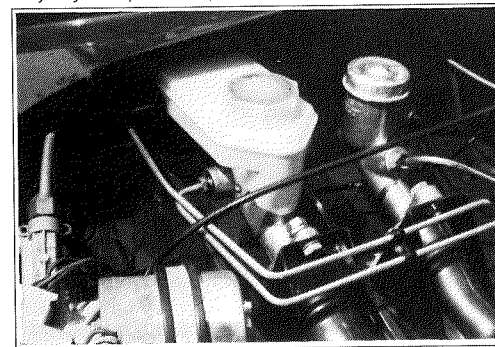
As part of the dual brake line system, a tandem master brake cylinder was introduced after FH 130000. Note the larger recess in the bulkhead and the lowered support brackets either side of the master cylinder.
